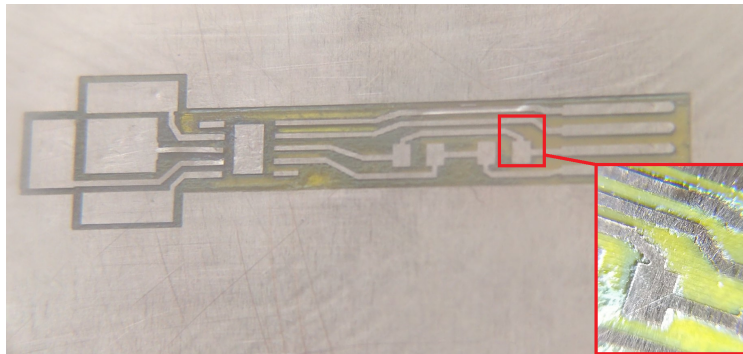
FPCB machined using the Atometric milling machine. Inset showing closer view of circuit traces.
